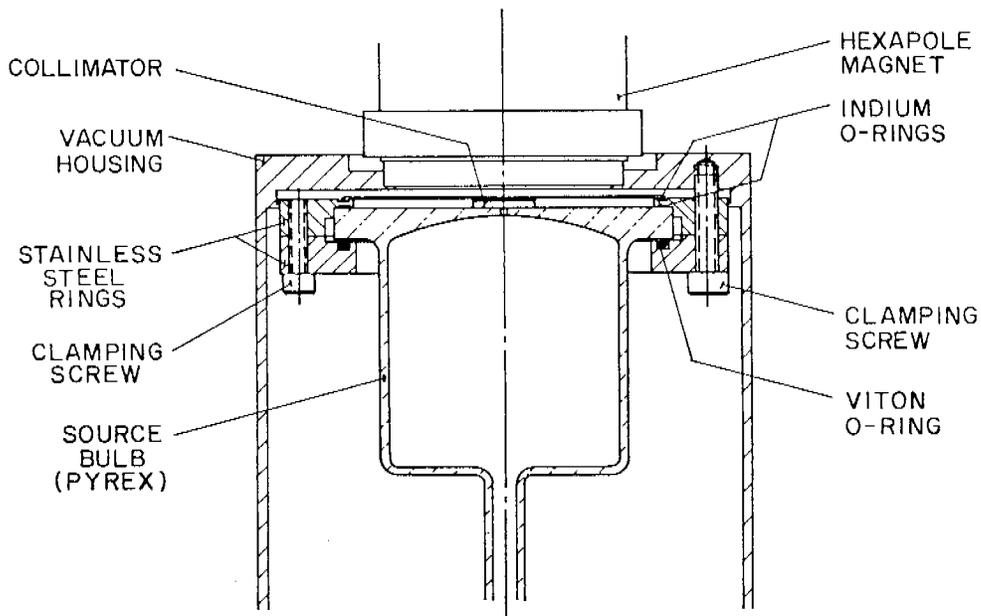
Detail of vacuum seal to the hydrogen source. The seal is shown in process of assembly.
